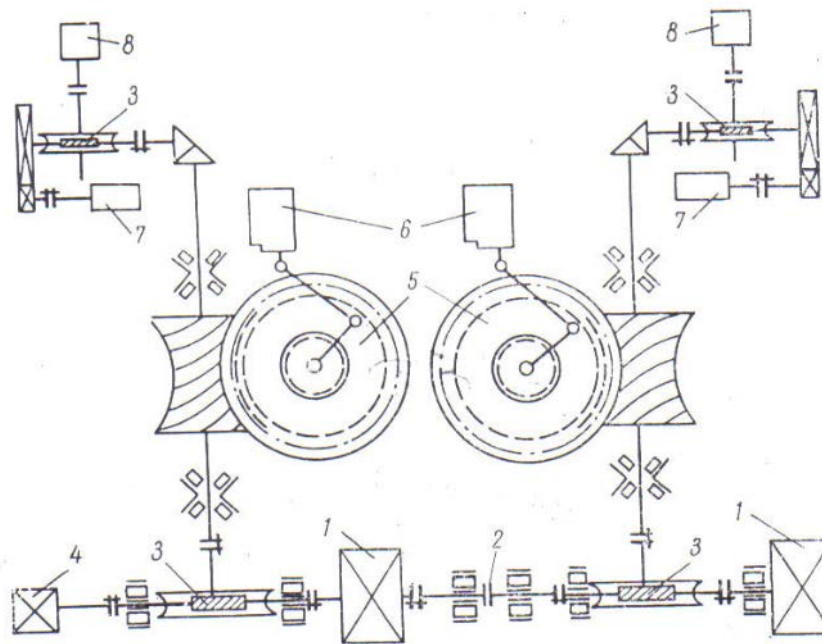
Schematic of the pressing device of the mill stand 650 [5].
